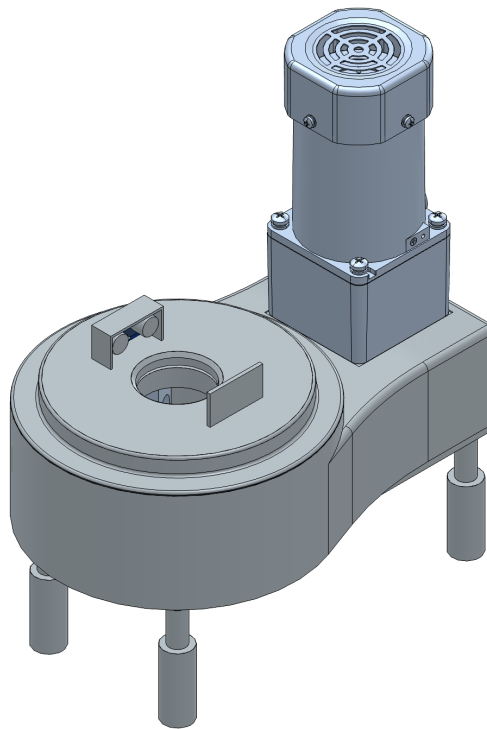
Final Design Of The Raptor With Clamping Blocks.
